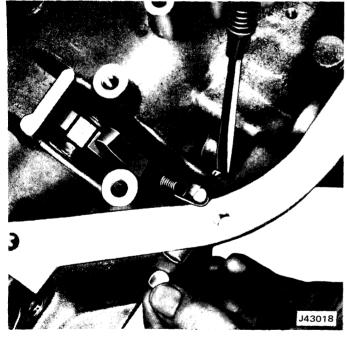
Removing Parking Pawl Shaft Cup Plug
